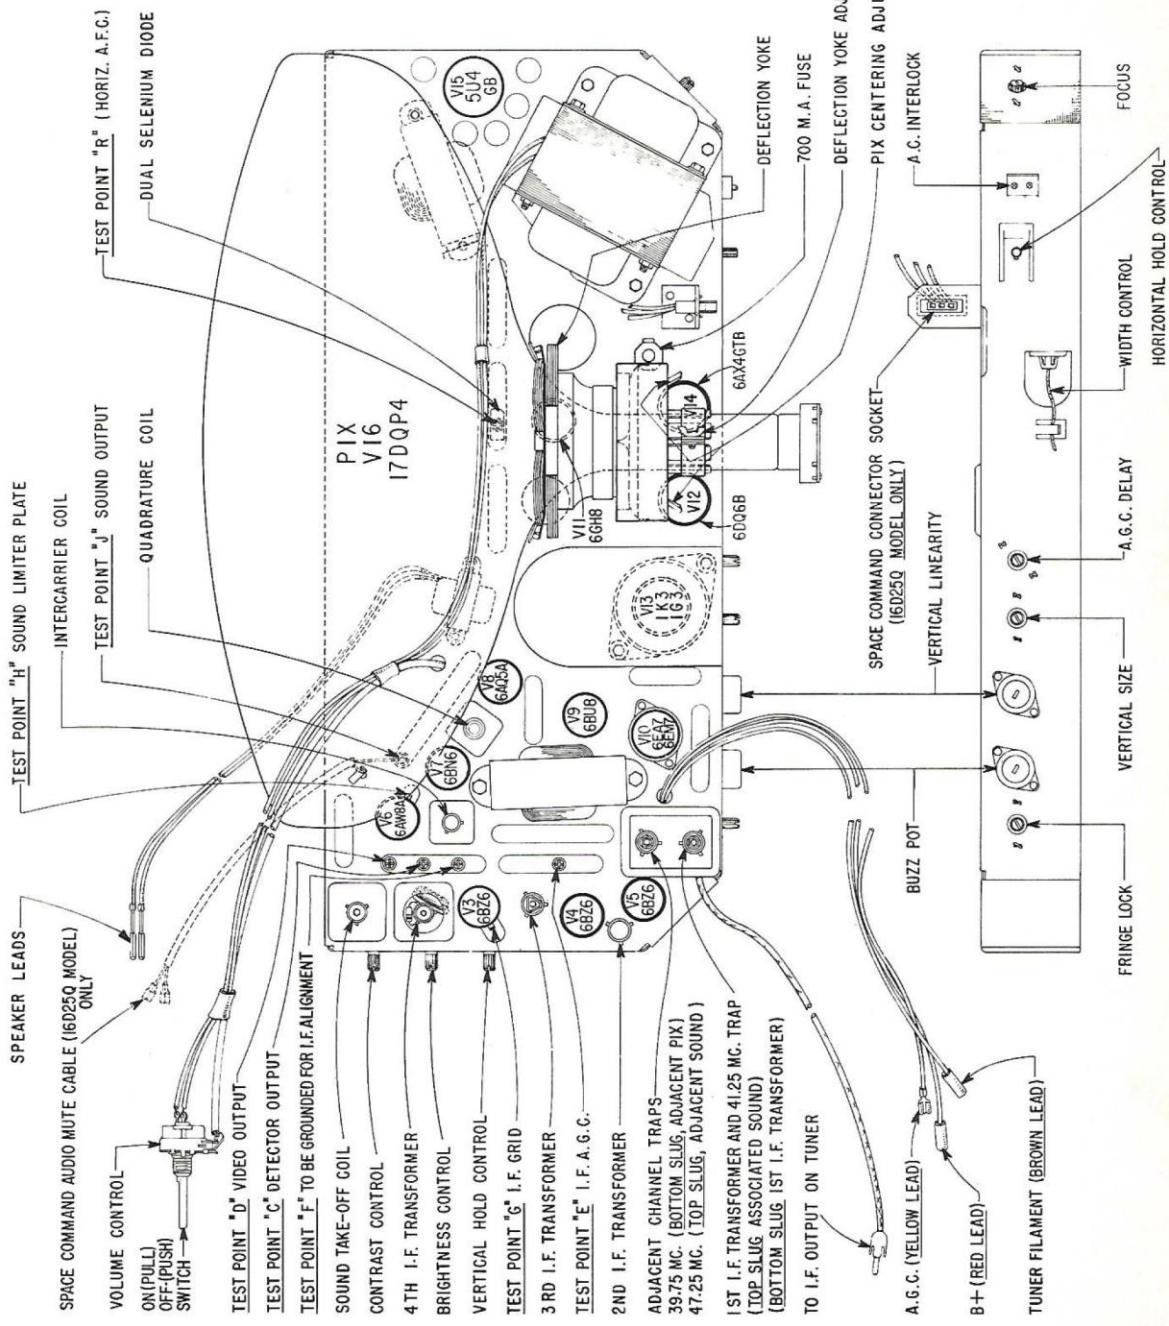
Tube and Trimmer Layout 16D25 and 16D25Q Chassis
